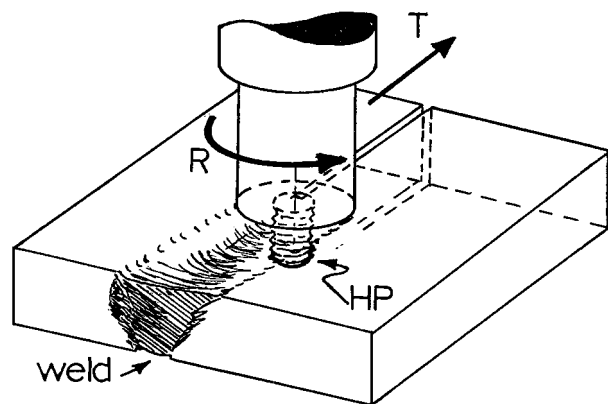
Schematic view of the friction-stir welding process. The rotating tool or head-pin (HP) is rotated at a speed R (rpm) while advancing along the butted plate interface at a rate of T (mm/s). A steel backing plate is placed beneath the butted plates to provide a stable platform for welding.
